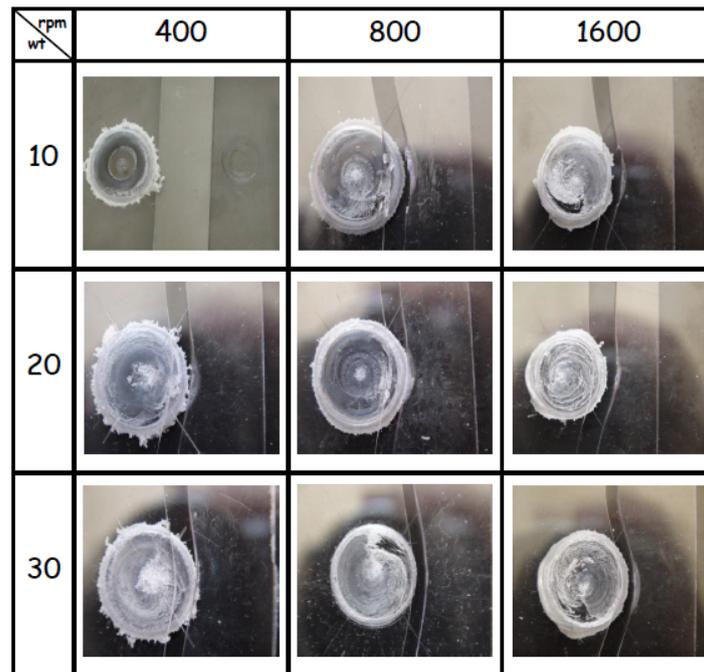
Macrosection of fractured Welded joint in different rpm and dwell time.
